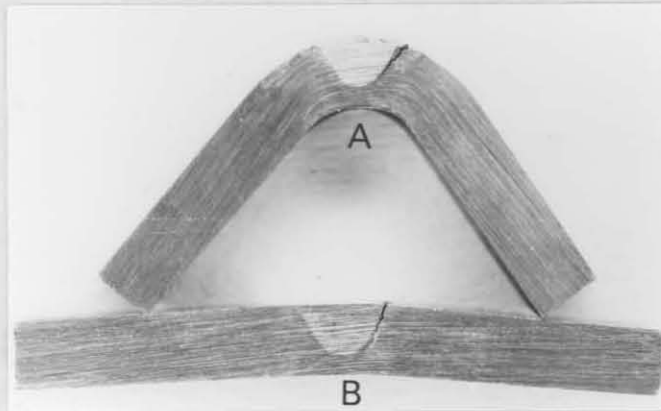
Hot rolled bead-on-plate 3CR12 bent specimens welded with a 316L (A) and E3CR12 (B) filler metal. Note the brittle cracks in the coarse grained HAZ adjacent to the fusion line.
